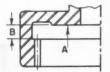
Drawing illustrating clearance recess for an internal gear.
